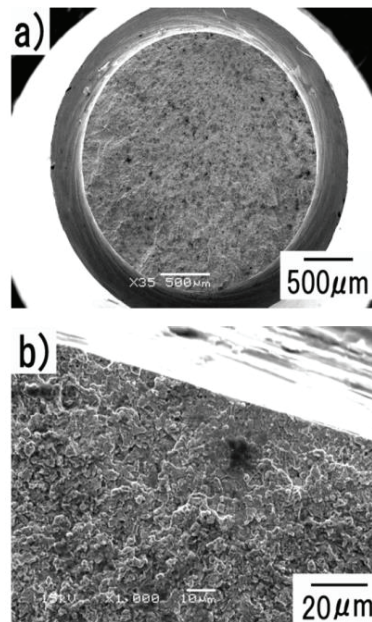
Fatigue fracture surface of notched specimen.
